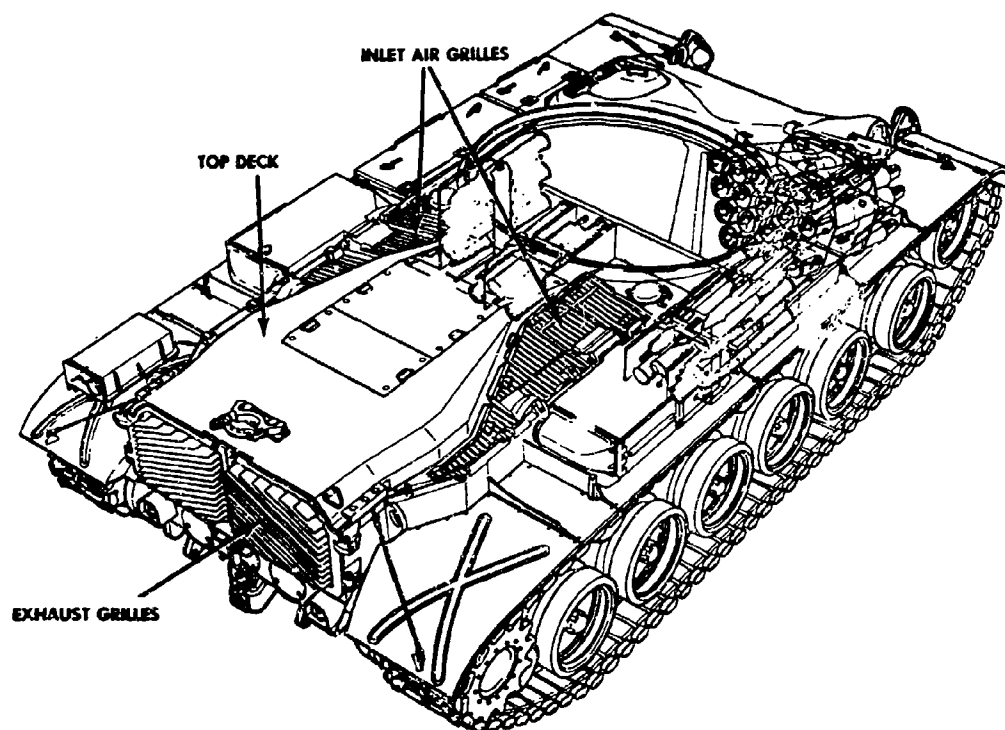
Tank, M60 Series, Cooling Air Inlet and Exhaust Grilles
